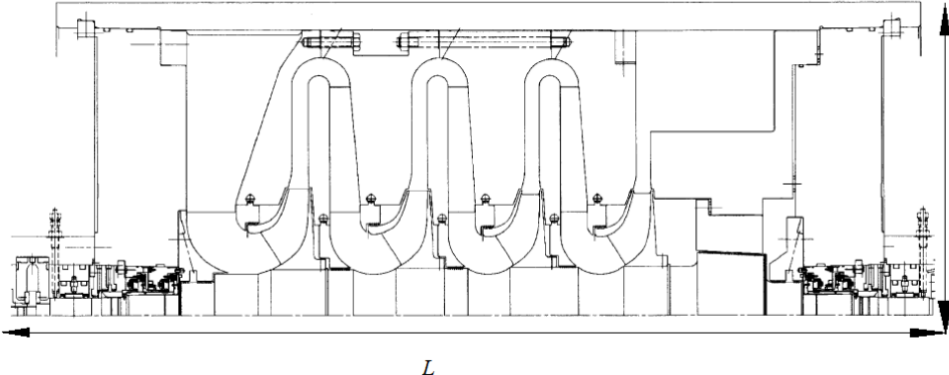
Single-shaft compressor with 4 impellers [18].
